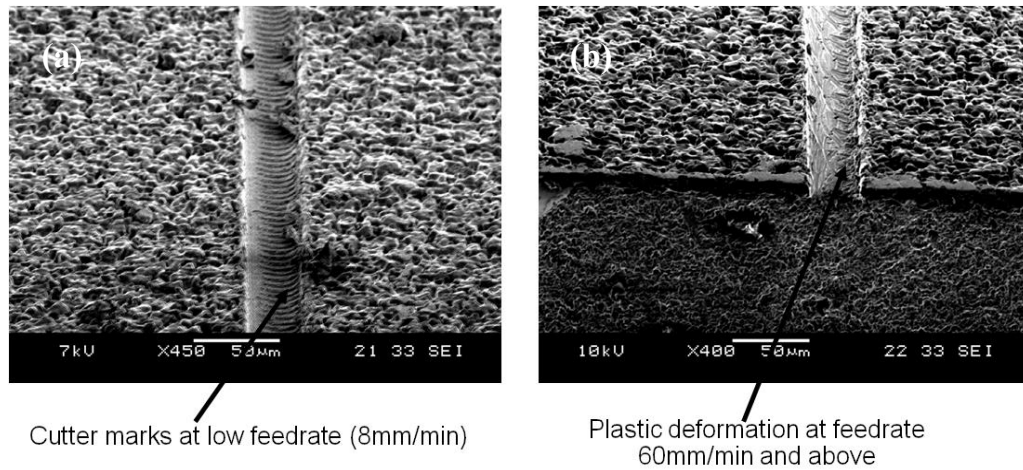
Close up view of the slots machined with PCD micro tools. (a) slot machined at 8mm/min feedrate, (b) slot machined at 60mm/min feedrate.
